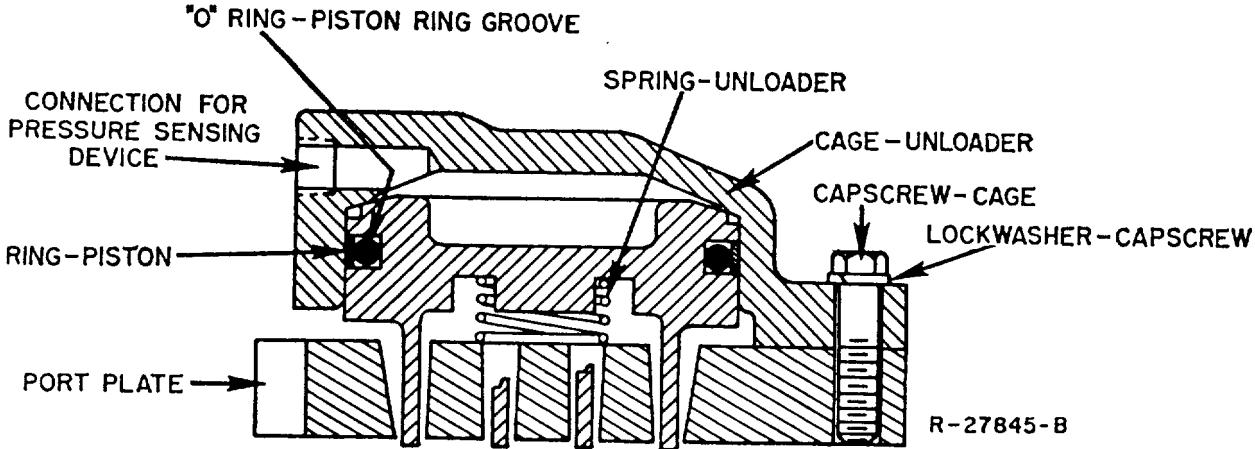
A-4 Type "A" Rectangular Channel Valve Free-Air Unloader.
